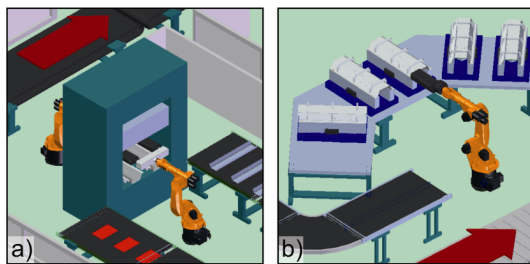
Automated prepreg-press process a) with a single press device and a double mould and b) with multiple, flexible press devices.
